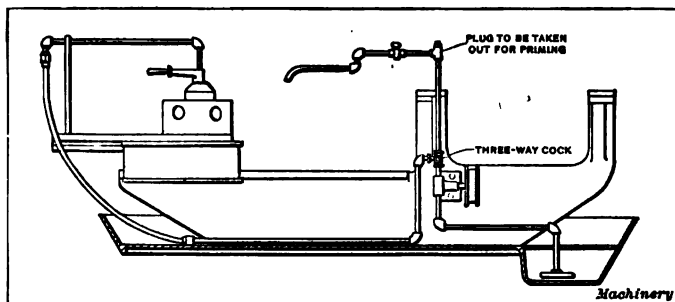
Lubricating Arrangement of Bardons & Oliver Turret Lathe
